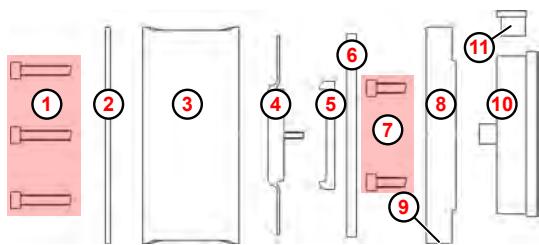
Replacement of diaphragm and pump head - type 00800-01200
